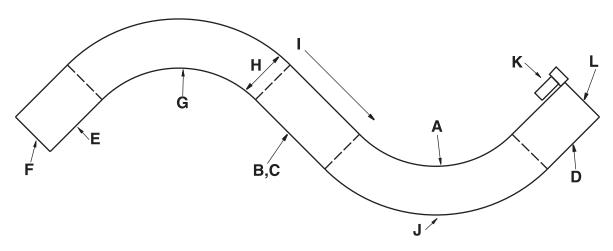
TYPICAL 2-TURN RADIUS LAYOUT
